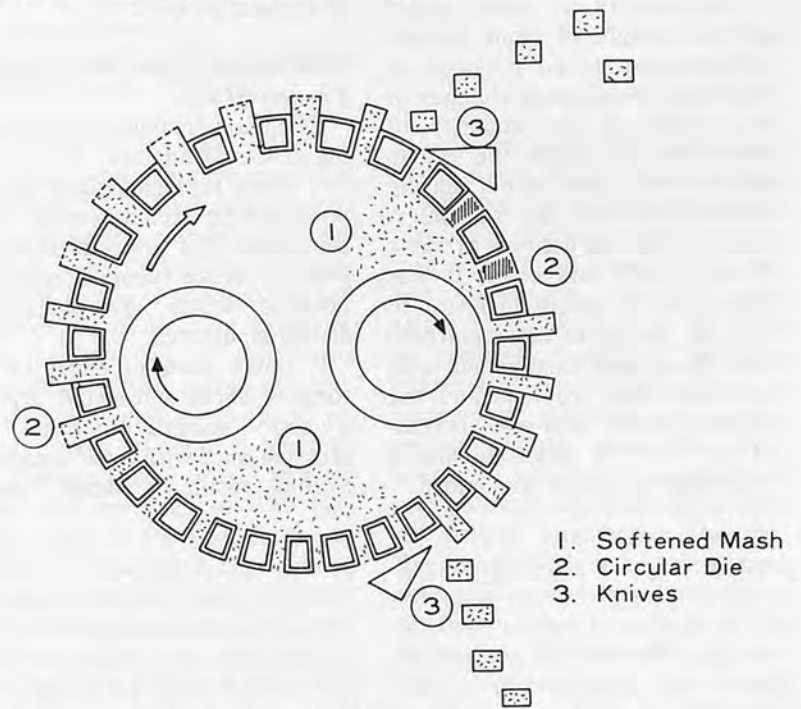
Typical Die and Roller Assembly Used for Producing Hard Pellets
